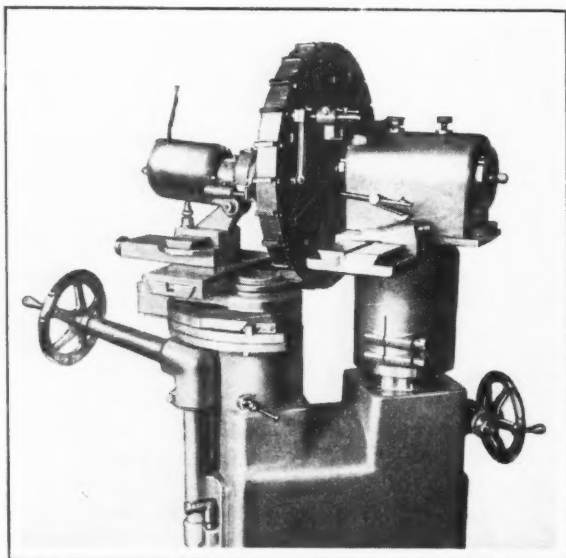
Oliver Grinder which Sharpens Face Mills up to 26 Inches in Diameter
